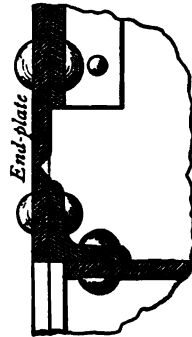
End-plate of Lancashire boiler weakened by corrosive grooving.
